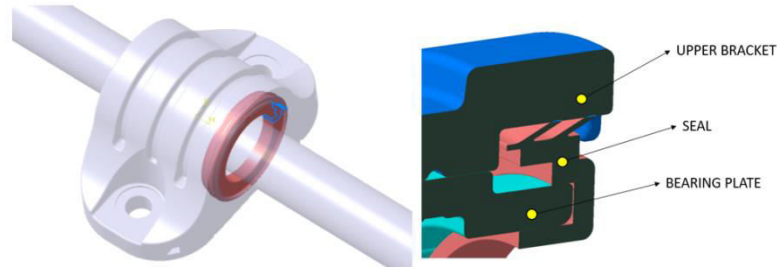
a. Seal in Stabilizer bar bush assembly, b. Section view of Stabilizer bar bush assembly, c. Nomenclature.
